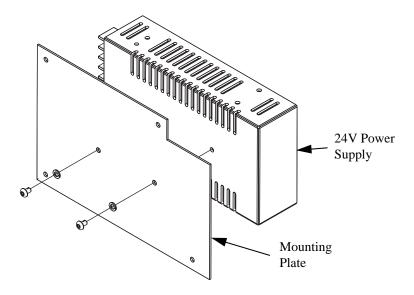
Removing the Mounting Plate from the 24V Power Supply
